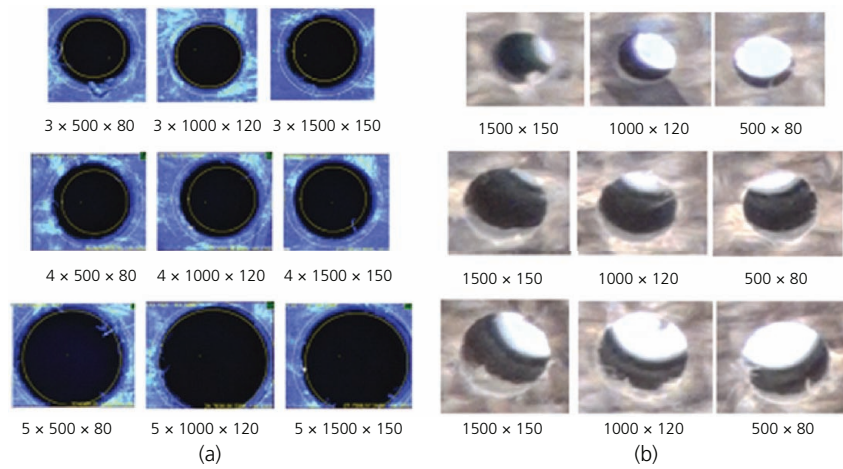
TAN-coated-carbide-twist-drilled hole: (a) two- and (b) three-dimensional views (all dimensions in mm)
